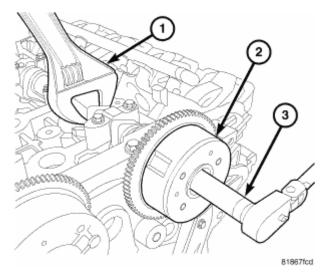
Cam Phaser Installation Courtesy of CHRYSLER LLC
